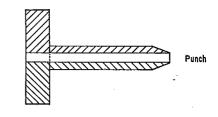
One Type of Tool for Extracting Coated Wood Specimens
